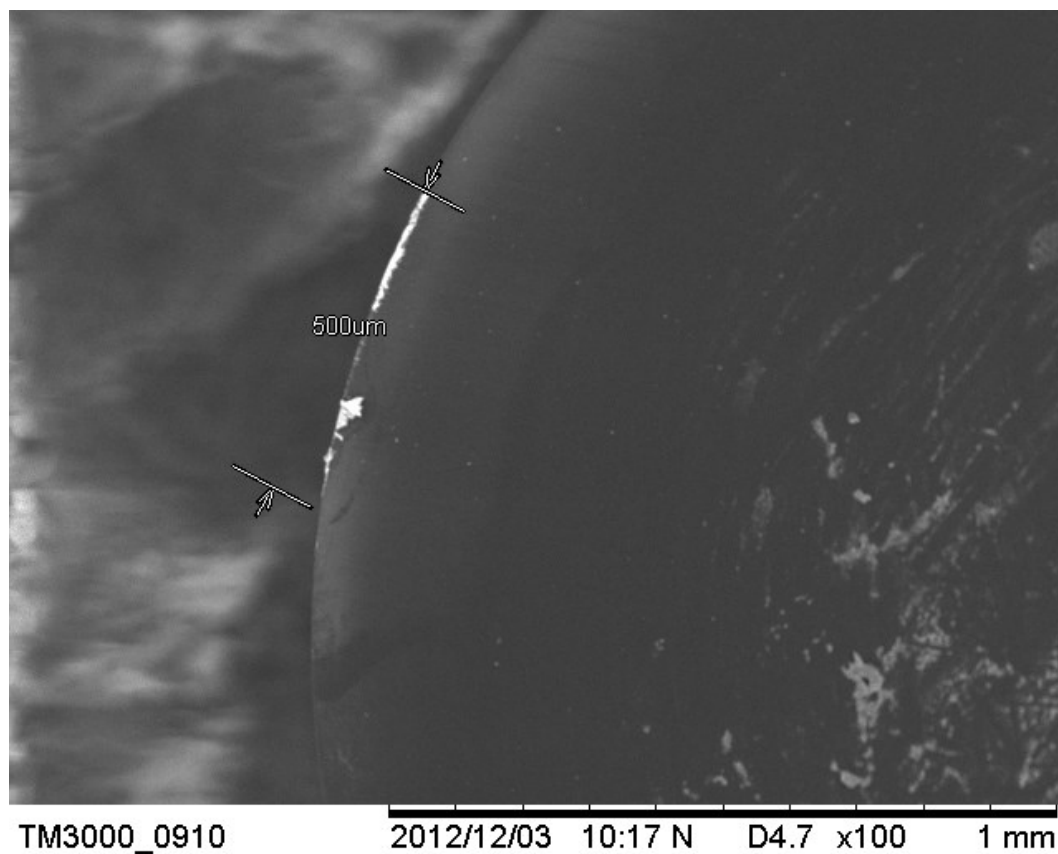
SEM image of Apex KC1.5mNEI tool after machining the BMG materials
